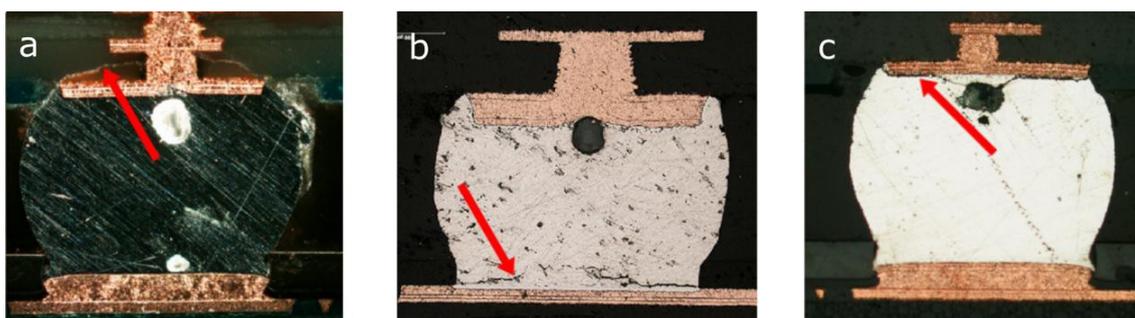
Typical failure patterns of PCBs during a BLDT or BLCBT:(a) Failure in the outermost epoxy layer, (b) Failure in the solder bump, close to the component, (c) Failure at the interface between solder bump and copper pad. (P. F. Fuchs et al., 2012)
